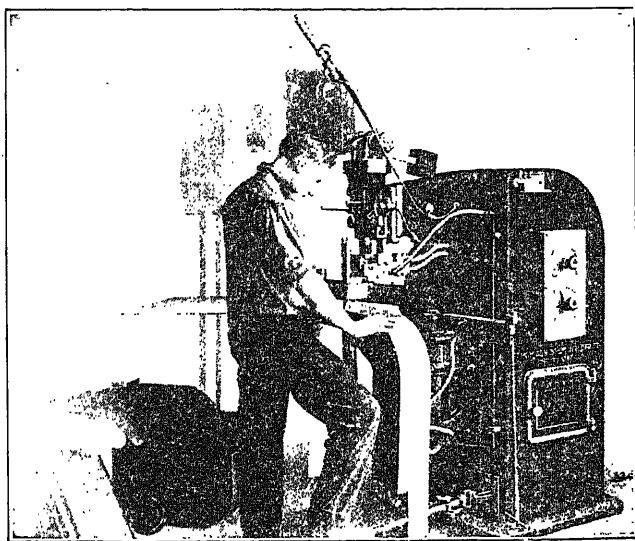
Welding 12-Gage Iron for Guards.
